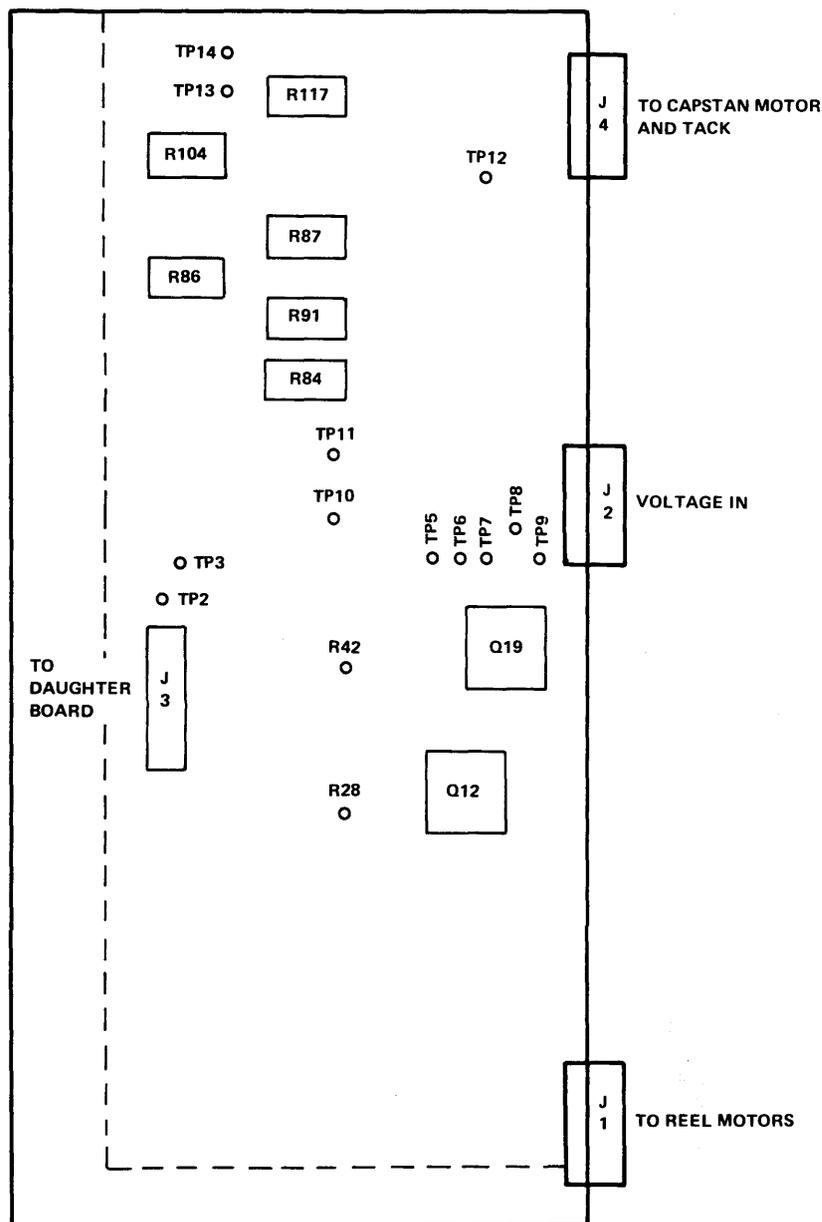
H607 Mother Board: Adjustments and Test Points
